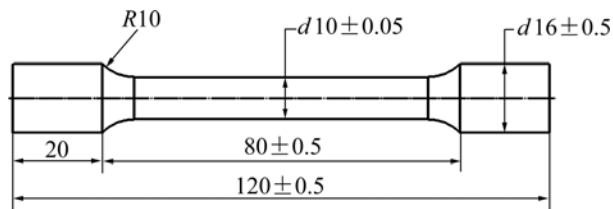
Shape and dimensions of tensile specimens (Unit: mm)
